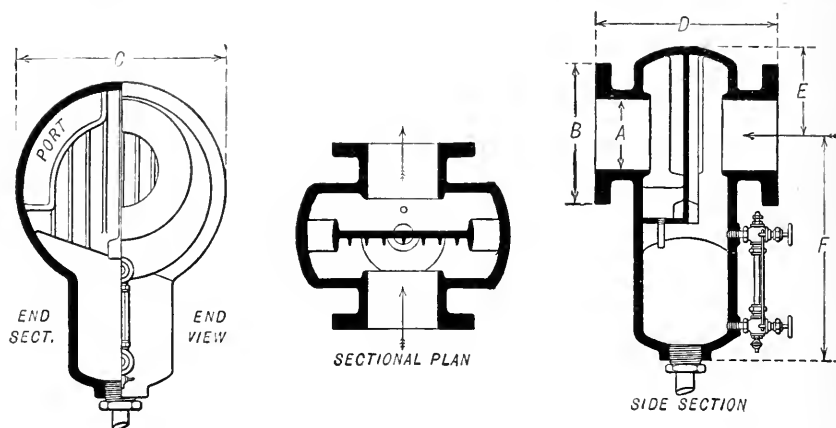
COCHRANE HORIZONTAL TYPE OIL AND STEAM.
